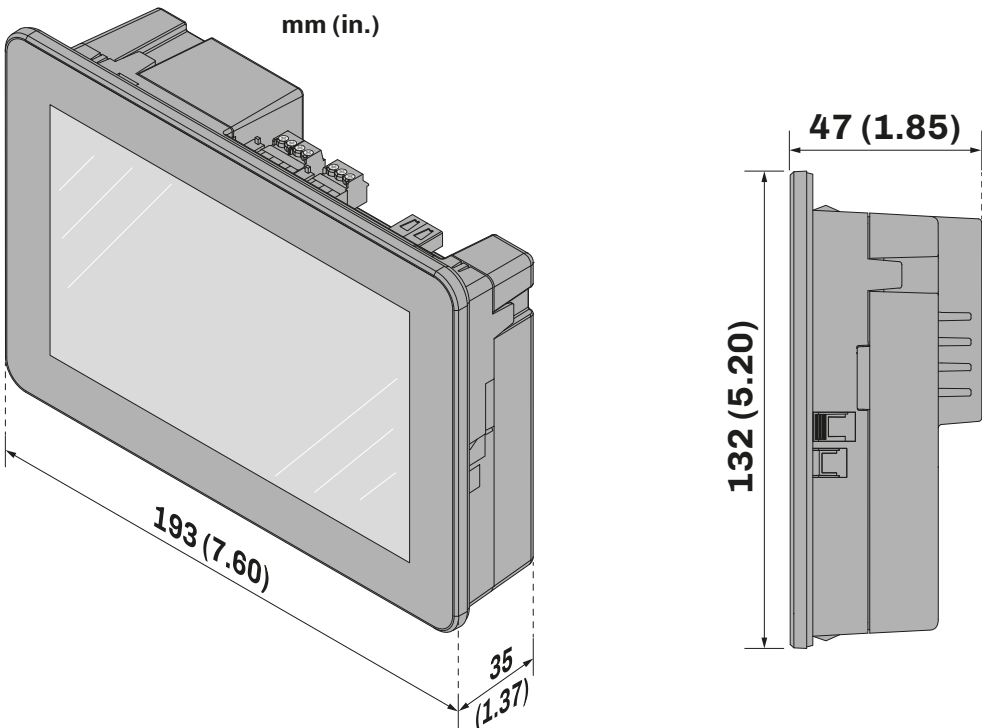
Front-mounting Vcolor 229-249 L user interface dimensions
